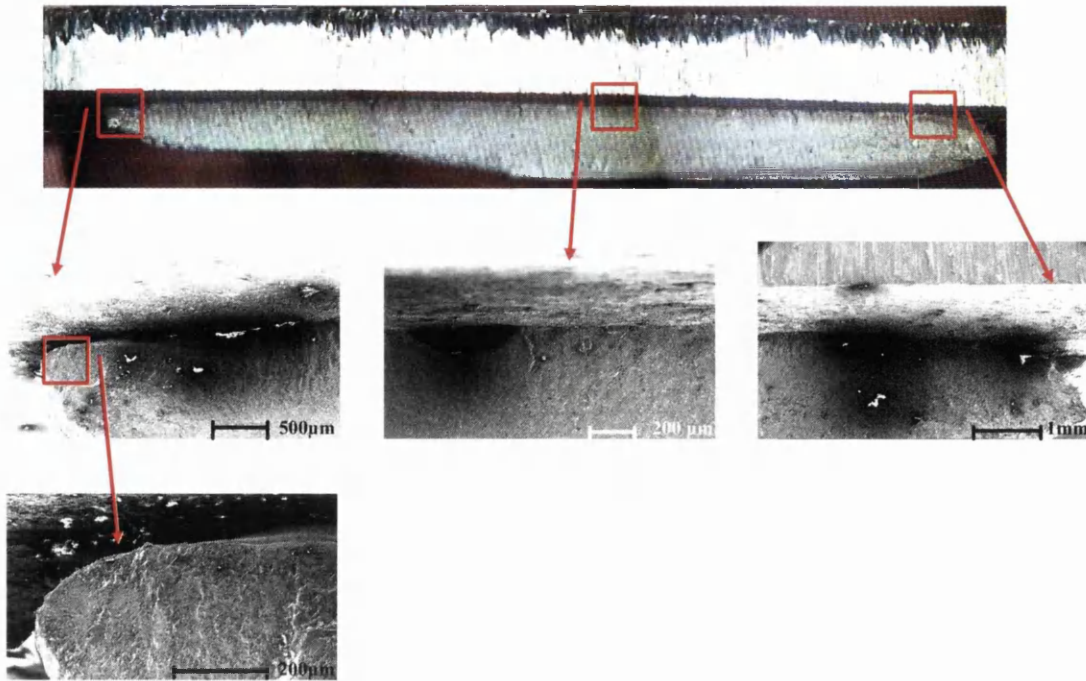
Typical Weld Throat Failure – Weld View, GM1
